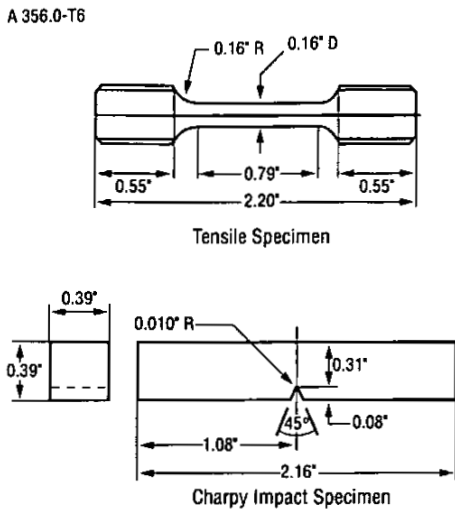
Configurations of tensile and Charpy impact specimens (Ref. 38)
